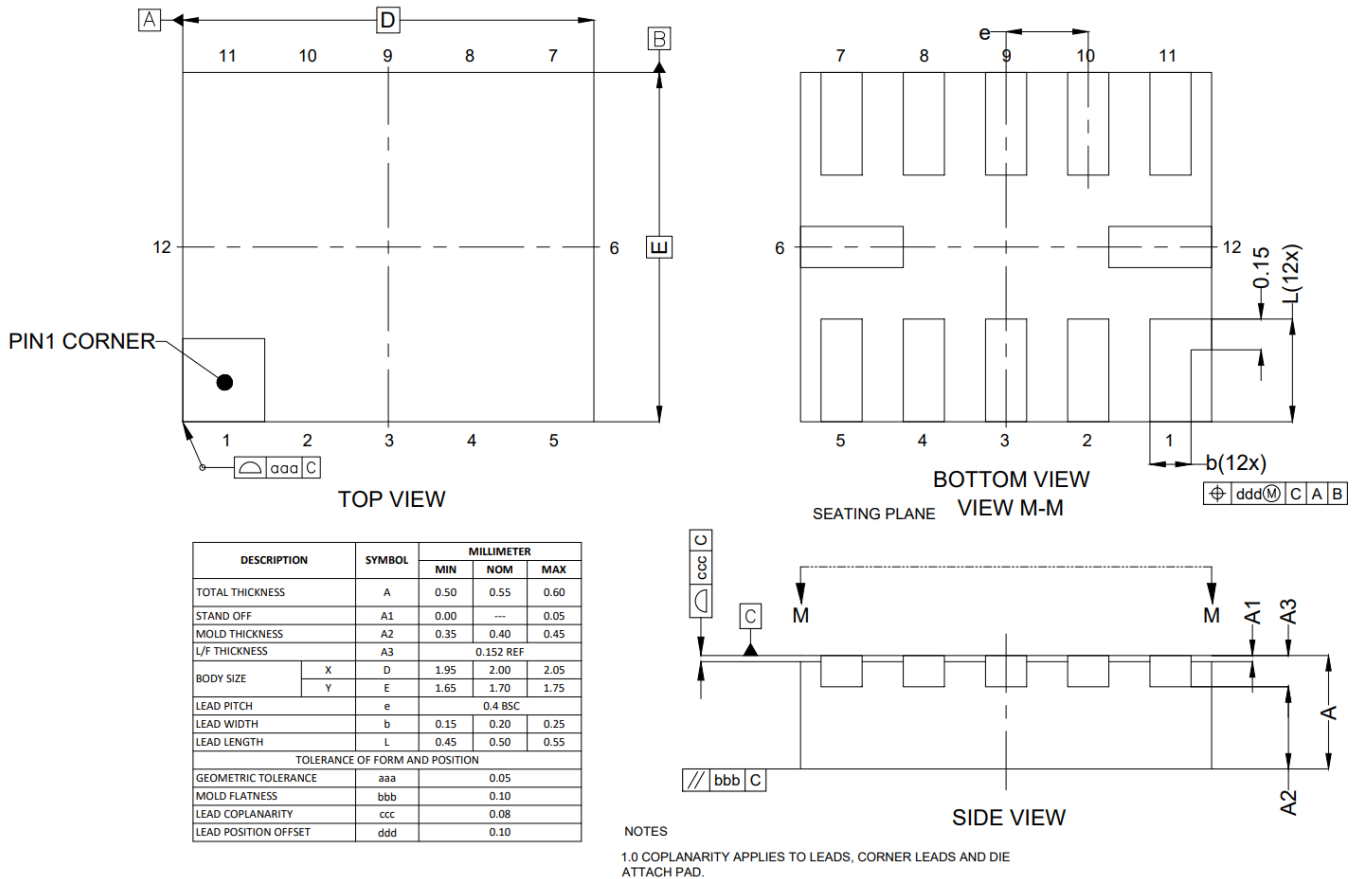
1 UQFN12 package shape and dimension in millimeters for NCAB0104-DQBDR
